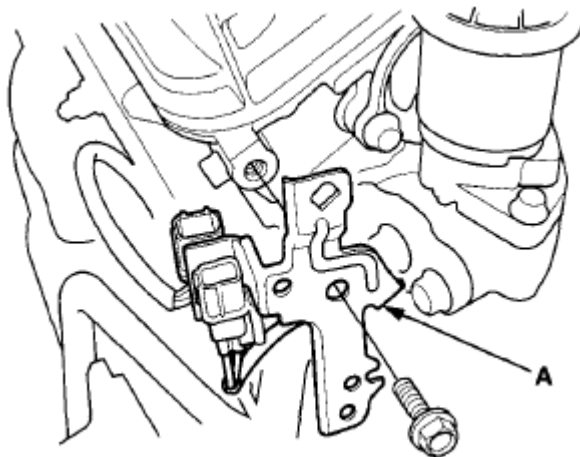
Removing Connector Bracket From Front Cylinder Head
